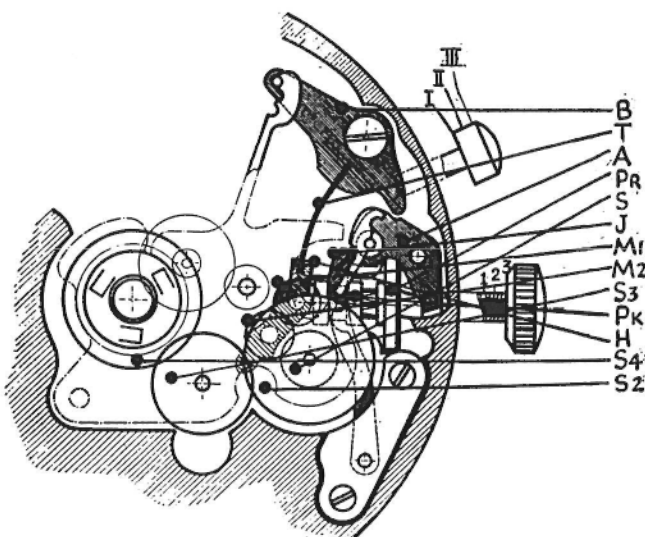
Position 3-I. B Alarm rocker; T spring blade; A setting lever; Pr winding pinion; S1 alarm setting wheel; J hand setting yoke; M1 first setting wheel; M2 second setting wheel; S3 alarm intermediate wheel; Pk clutch wheel; H clutch yoke; S4 unlocking (discharging) wheel and S2 alarm setting wheel.
